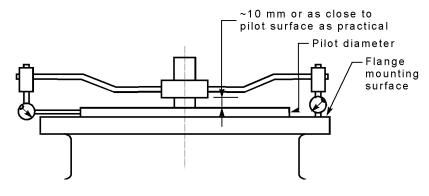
Pilot and flange mounting surface runout measurement fixture
